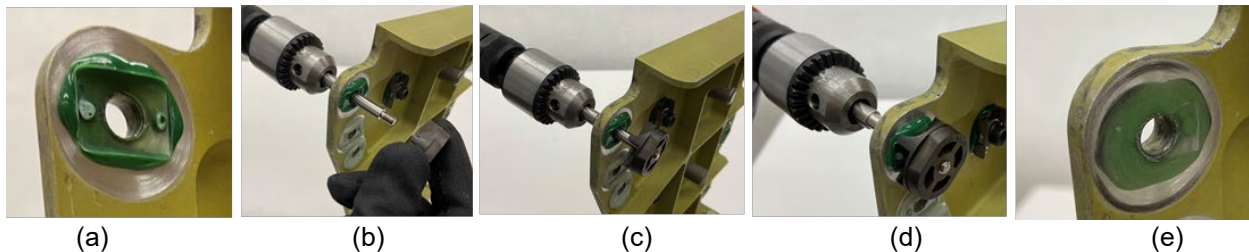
Removal of Residual Sealant/Adhesive with Torlon Adhesive Cutters – Drill Motor – Standard and Segmented Mandrel
